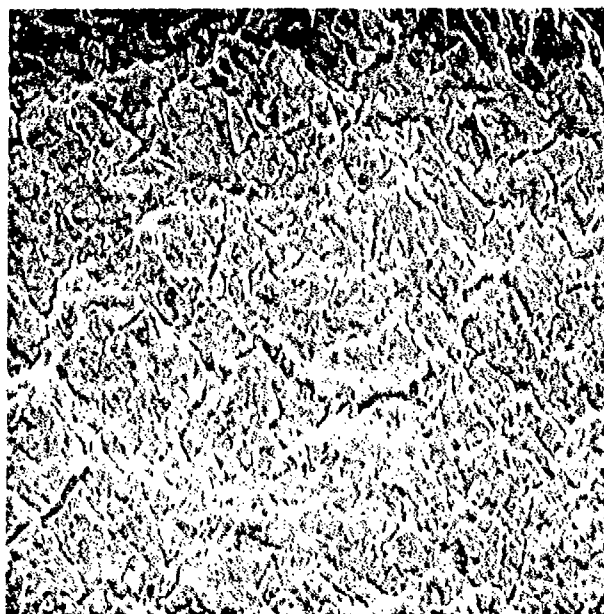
Fatigue region of fracture surface of AX-110 weldment containing porosity, 1380x.
